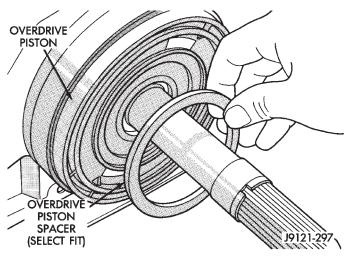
Overdrive Piston Thrust Plate Removal/ Installation
